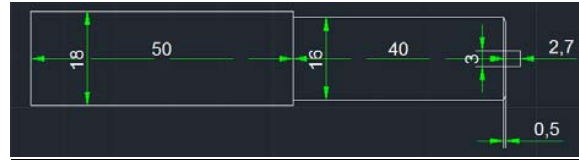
Friction stir welding straight cylindrical tool
